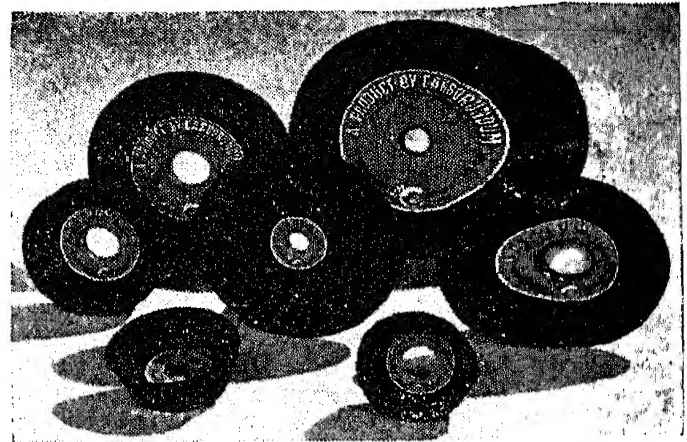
A few typical grinding wheels. (Courtesy The Carborundum Co.)
